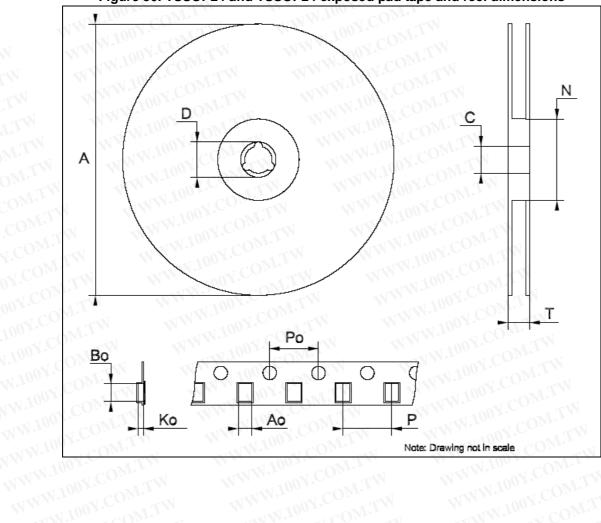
TSSOP24 and TSSOP24 exposed pad tape and reel dimensions
